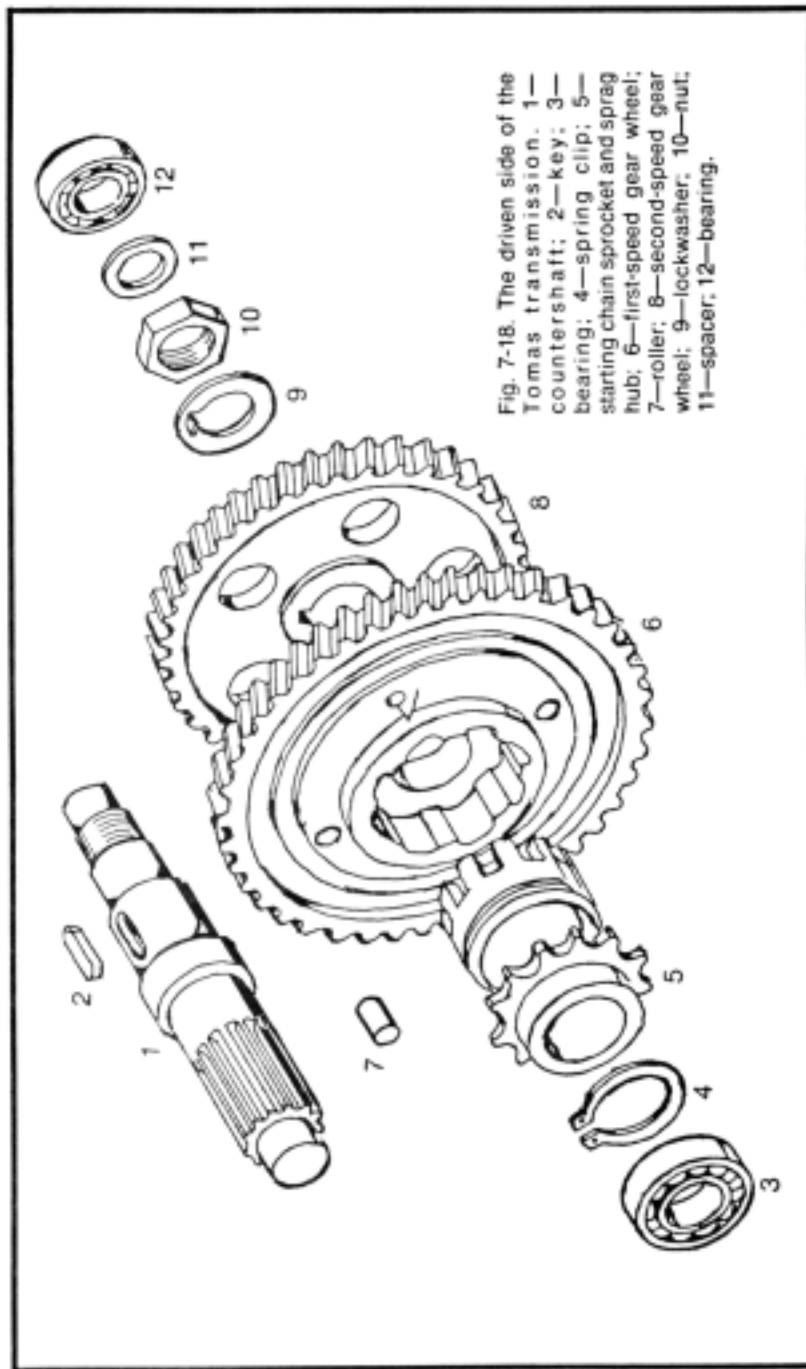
The driven side of the Tomas transmission. 1—countershaft; 2—key; 3—bearing; 4—spring clip; 5—starting chain sprocket and sprag hub; 6—first-speed gear wheel; 7—roller; 8—second-speed gear wheel; 9—lockwasher; 10—nut; 11—spacer; 12—bearing.
